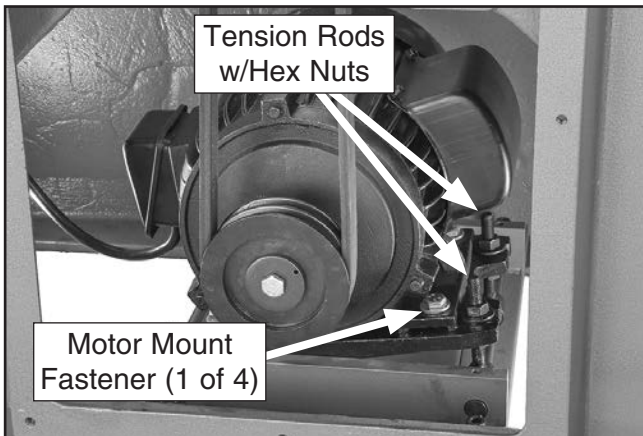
Location of motor tension rods, hex nuts, and motor mount fasteners.
